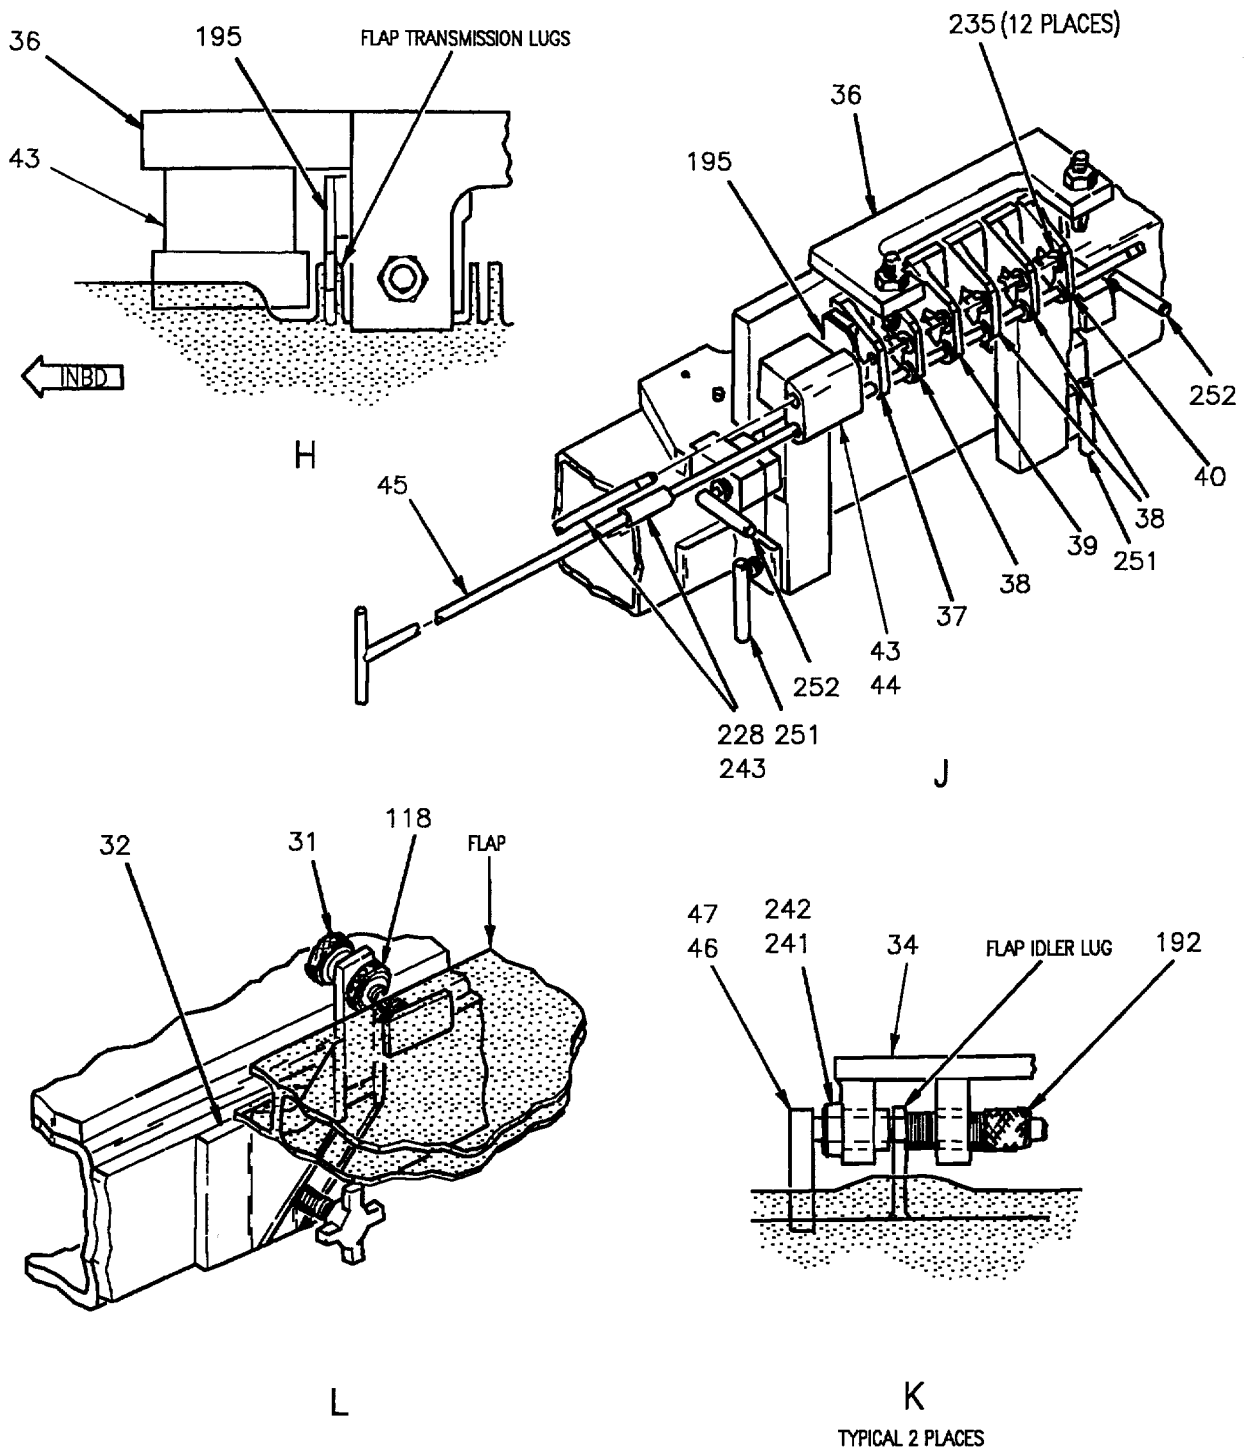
Installation of Flap with Damaged Bushings into Fixture (Sheet 6)
